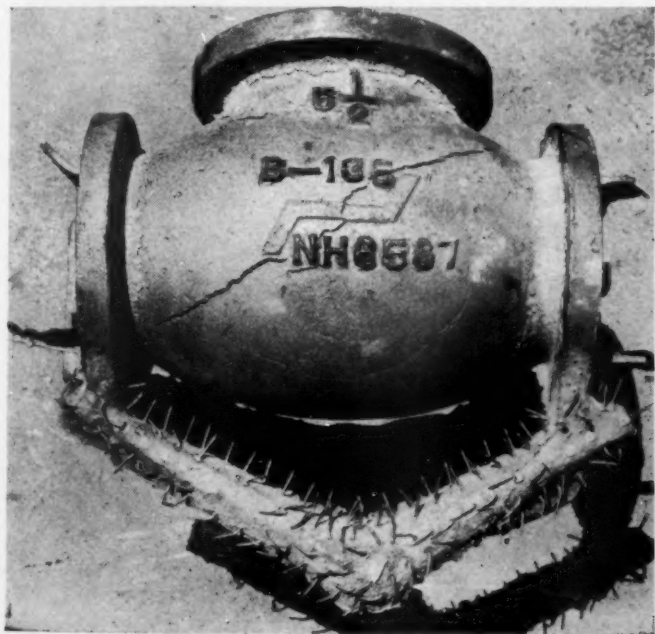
SHOWING CRACKED CASTING DUE TO CORE BEING TOO HARD.
